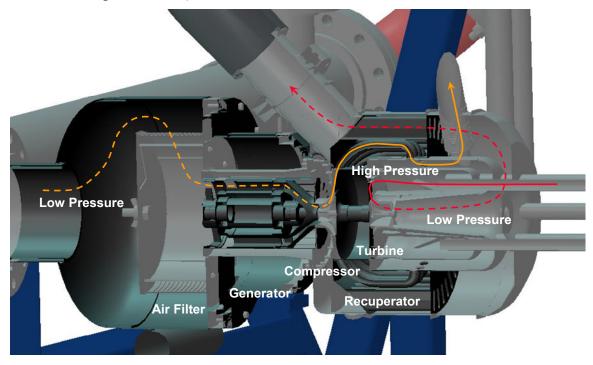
Capstone C-30 turbo-alternator-compressor engineering drawing cutaway showing the gas flow path. Orange lines show the flow path through the compressor and recuperator, red lines show the flow path through the turbine and recuperator.
